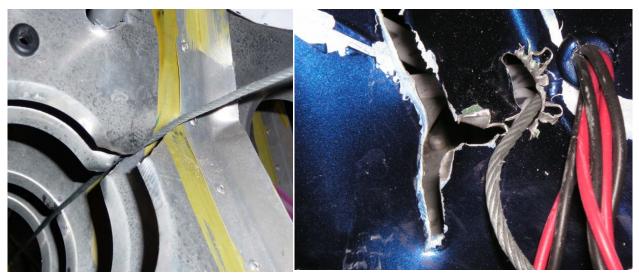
tears in wing ribs and fuselage sidewall caused by aileron control cables
